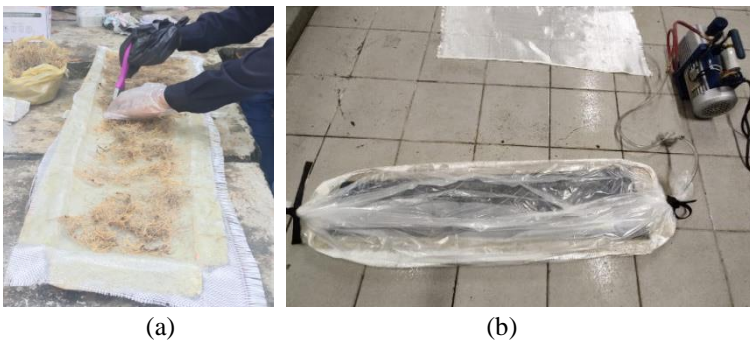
(a) Hand lay-up (b) Vacuum bagging
